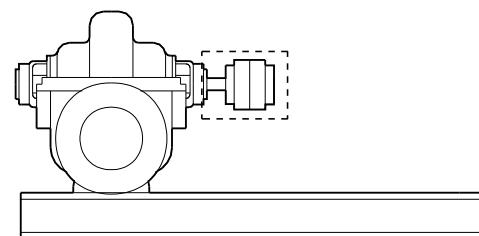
HS bare shaft pump with base frame, coupling and guard
